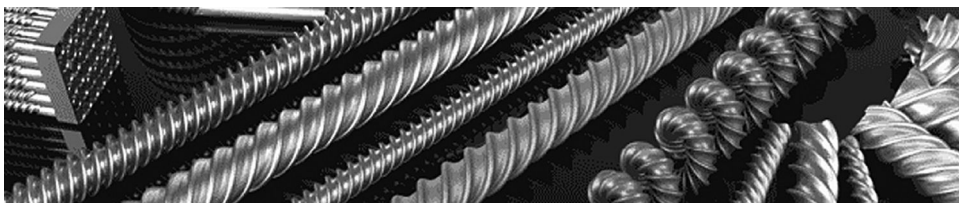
Spirally fluted tubes—a collection of enhanced fin tubes. (Courtesy of Turbotec Products, Inc., Windsor, CT.)
